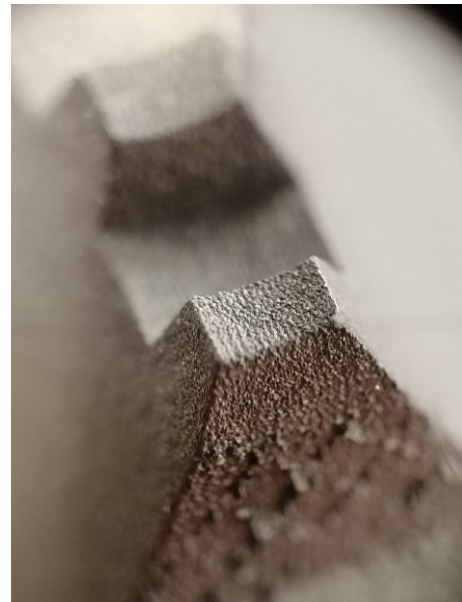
Close-up of a crimping die by Lillbacka. Printed parts are very slightly porous.
